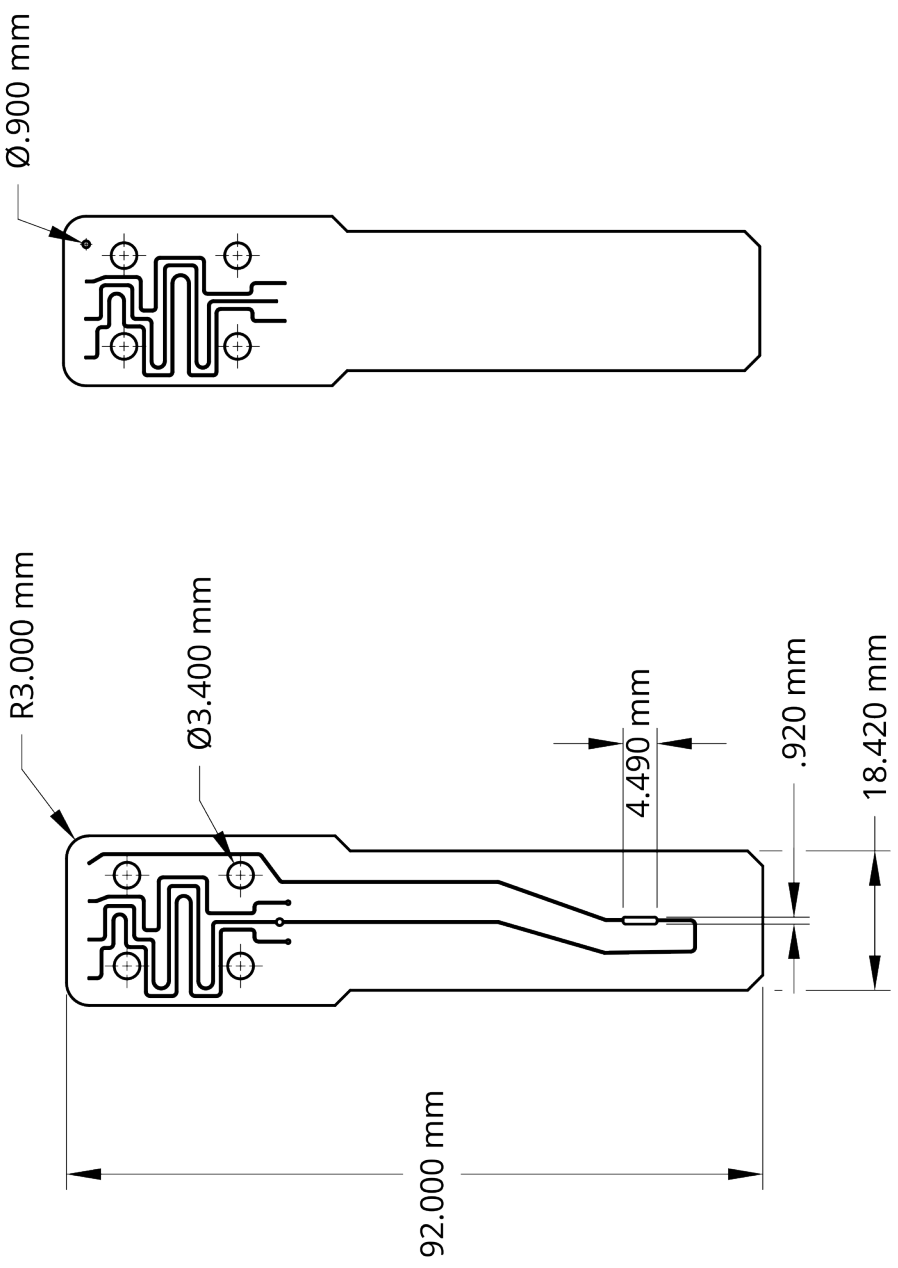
Technical drawings of the β -chip. Scale 1:1
